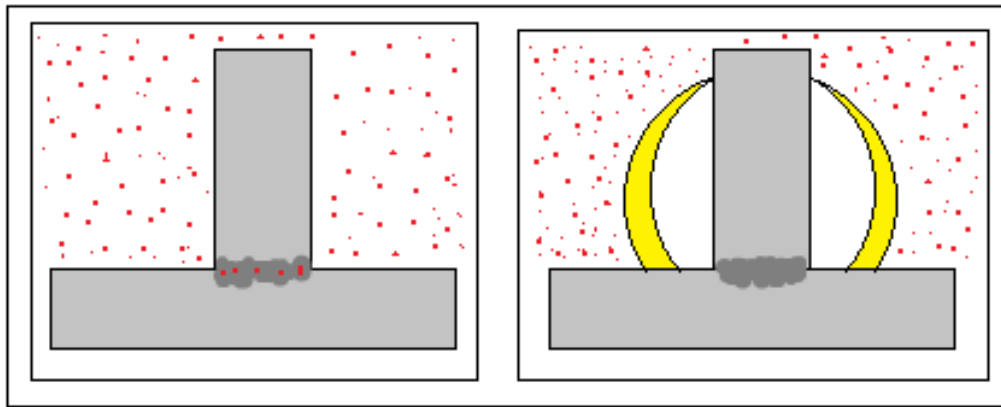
Shielding gas weld protection from atmospheric contaminants
